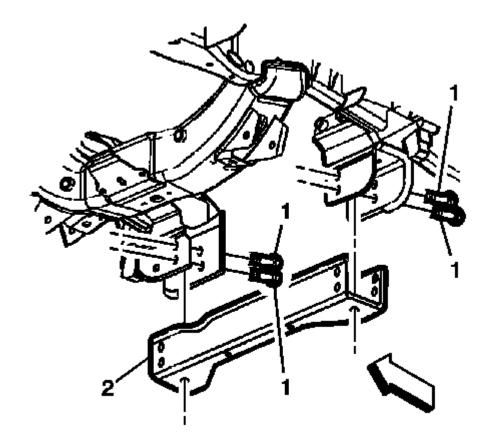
View Of Crossbar Bolts & Bar (2WD) Courtesy of GENERAL MOTORS CORP.
